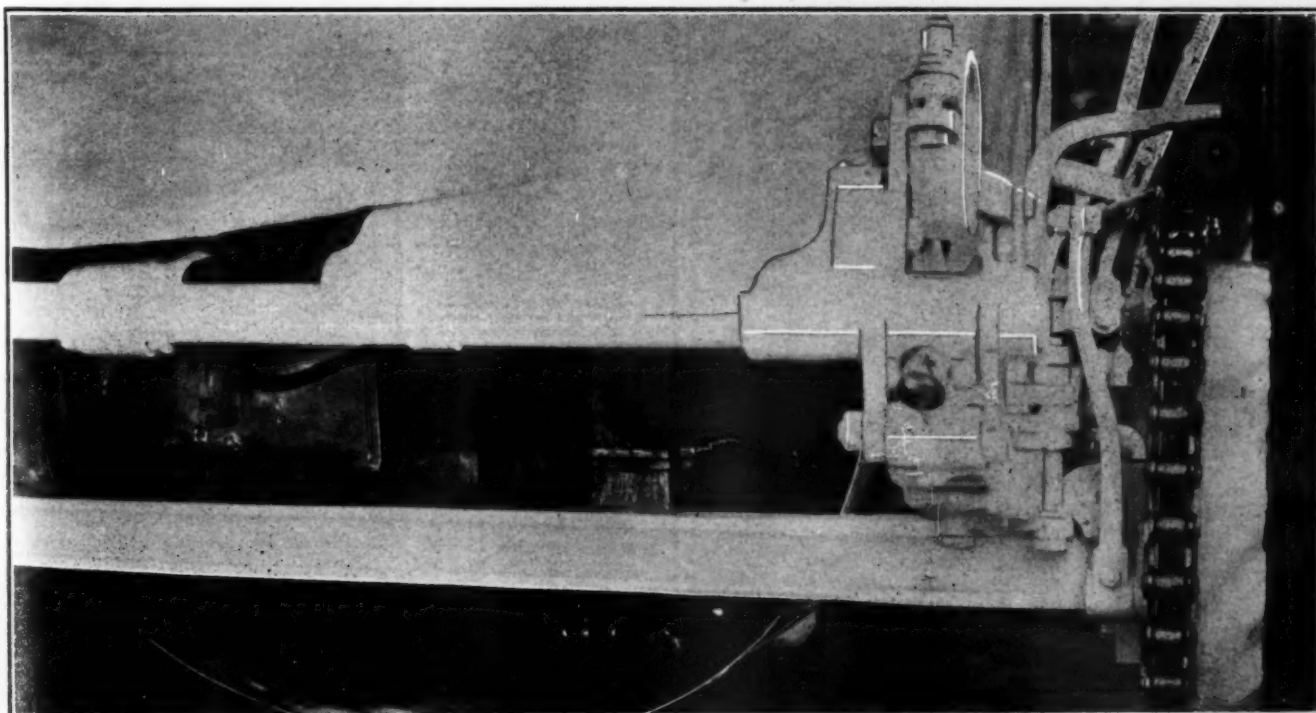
Rear axle of the same car, showing I-section forging, shock absorber, spring suspension, and chain drive
